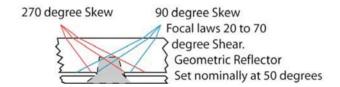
Sketch of ultrasonic sweep for UT array scans of the FSW plates. Transducer scanned from the bottom of the plate on either side of the weld traveling in the direction of the weld.
